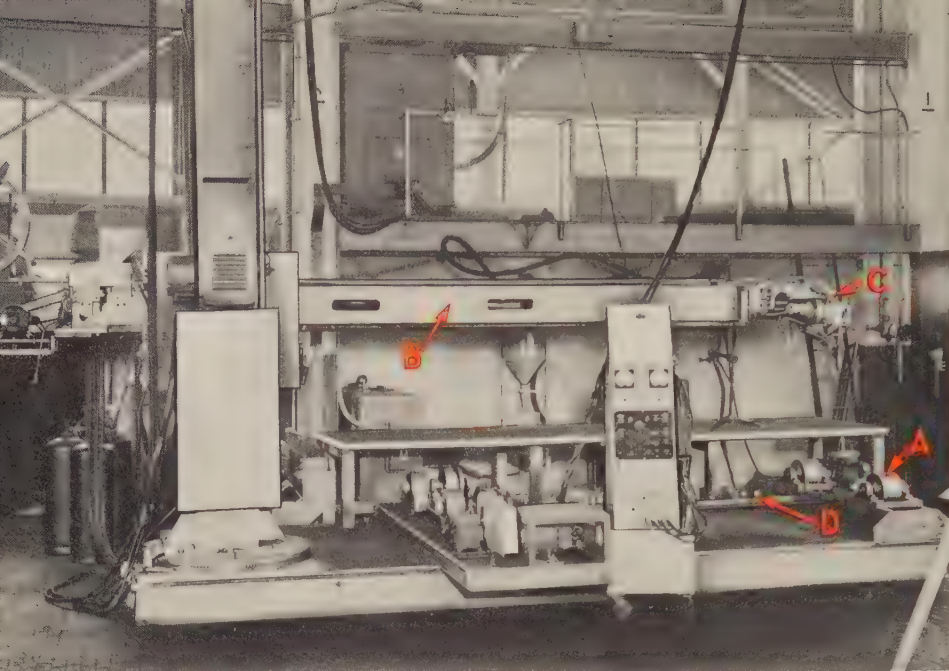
Both the interior and exterior welds on the completed crankcase assembly are performed on the same welding fixture which was specially designed to facilitate use of the submerged-arc welding process. The crankcase is supported and rotated on 4 rollers *A* during the welding operation. A horizontal arm *B* supports the welding head *C* and is extended or retracted to locate each interior and exterior weld joint. A horizontal pipe *D* contains natural gas burners to maintain the crankcase at 450° F welding pre-heat temperature.
